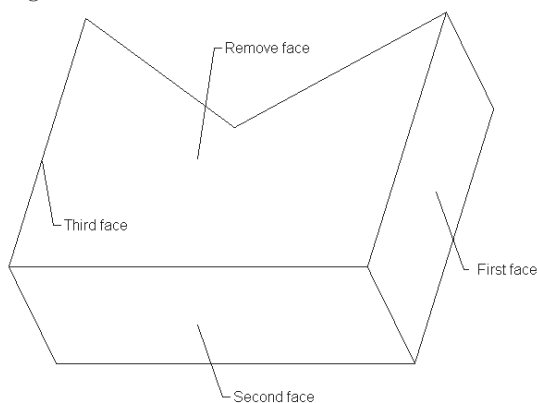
Faces of the model selected for variable thickness and the top face to remove
